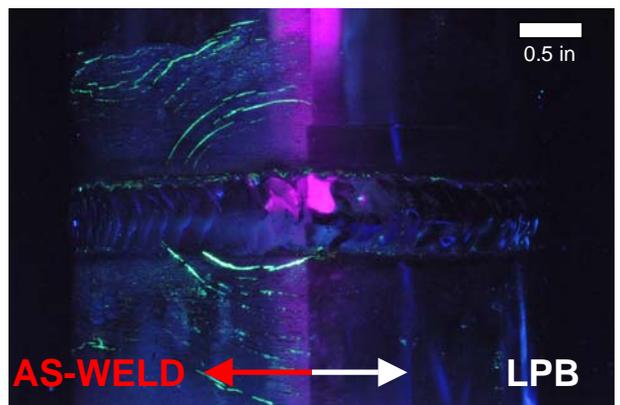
Black light fluorescent dye defines severe SCC cracking on un-treated side of a 316L SS pipe weld specimen.
